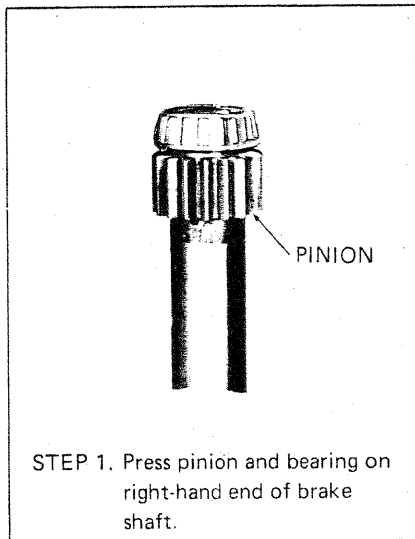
INSTALLATION OF BRAKE SHAFT (Sheet 1 of 2)
